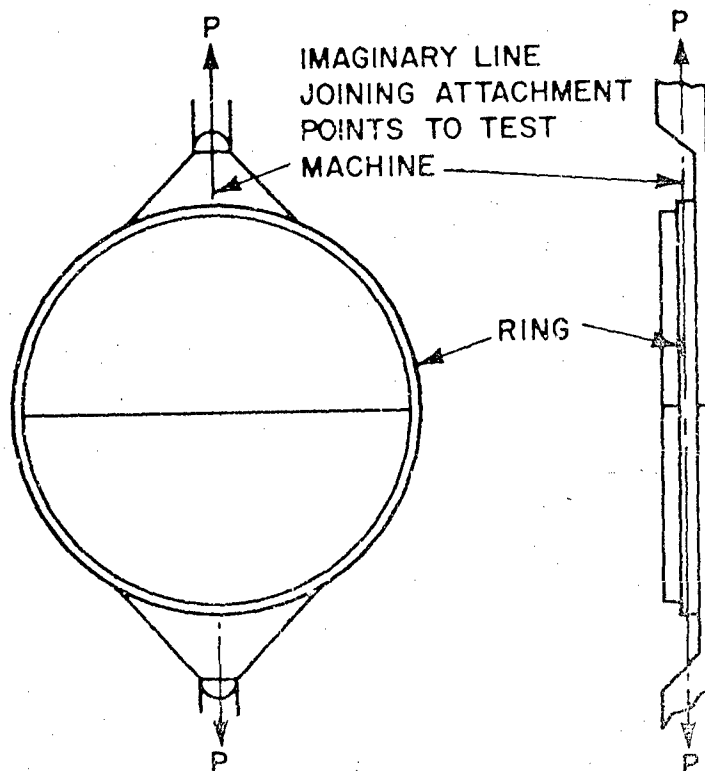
SPLIT DISC TEST SPECIMEN UNDER LOAD
